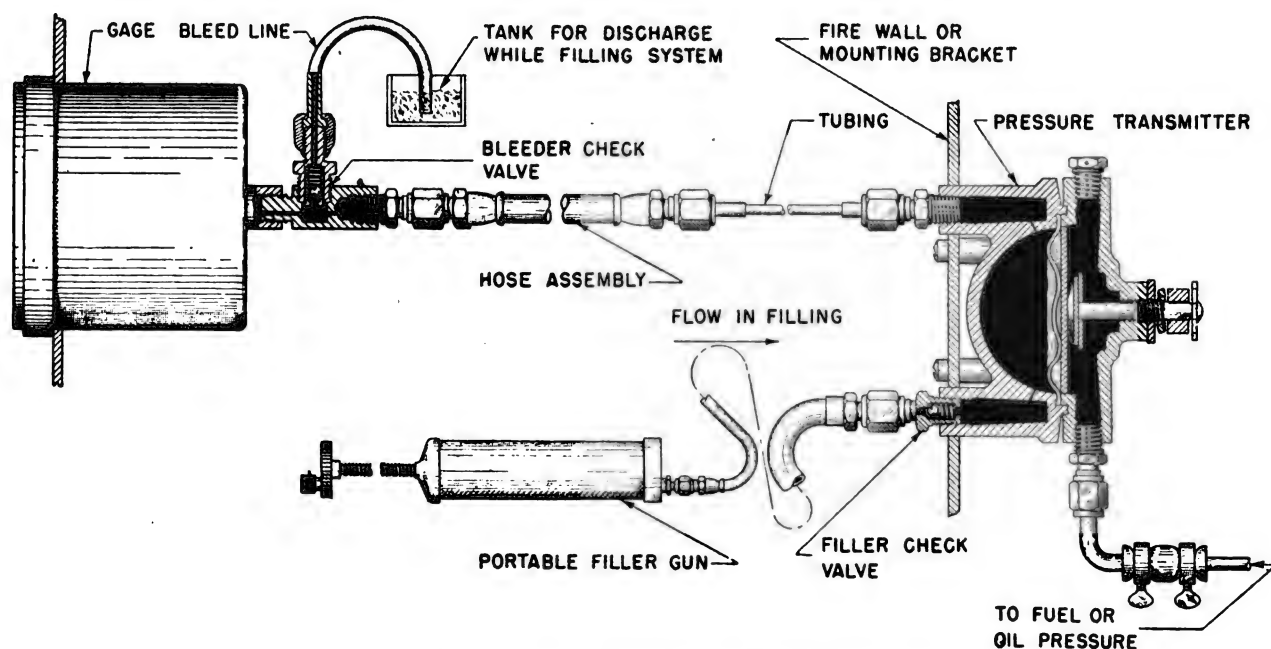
Type A-1 pressure-transmitter system—showing method of filling.
